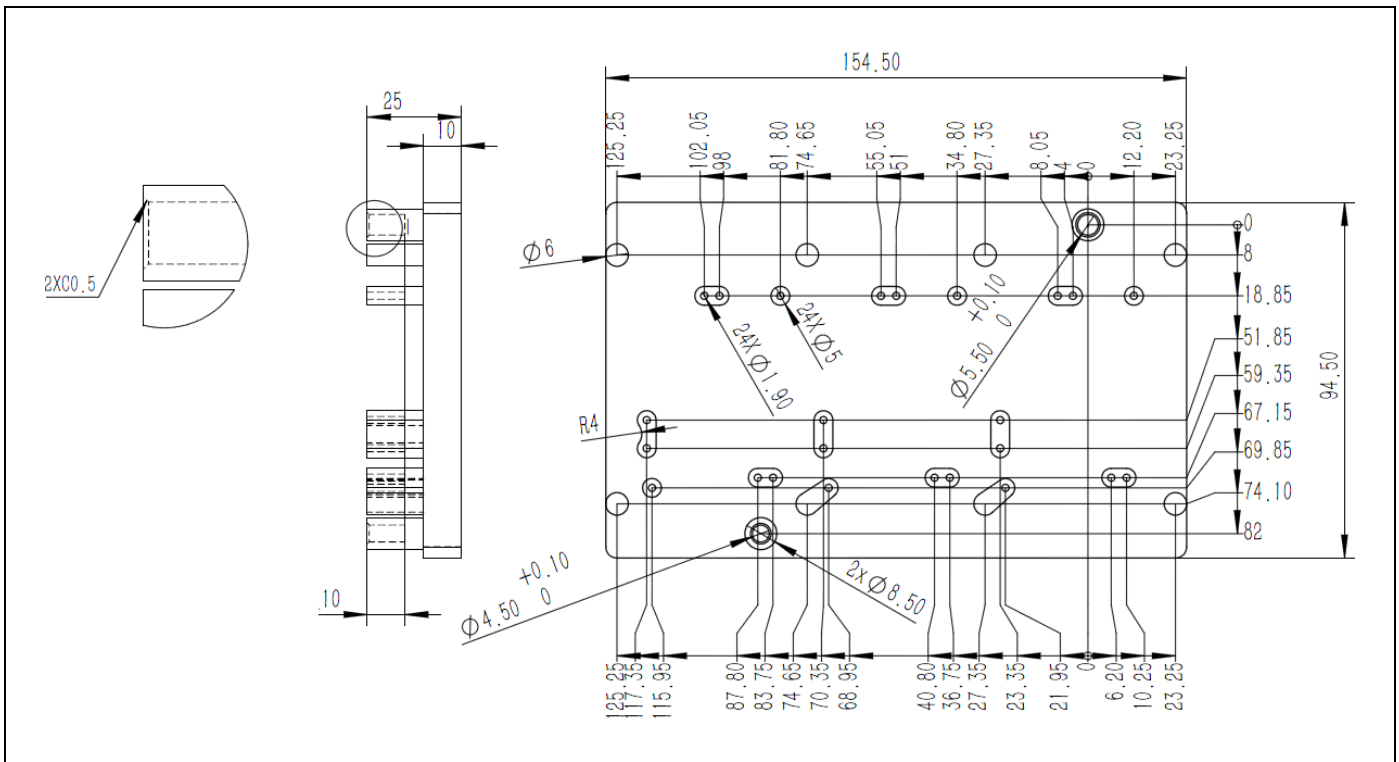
Technical drawing of the top press-in tool; Material: 1.4301 (V2A).
